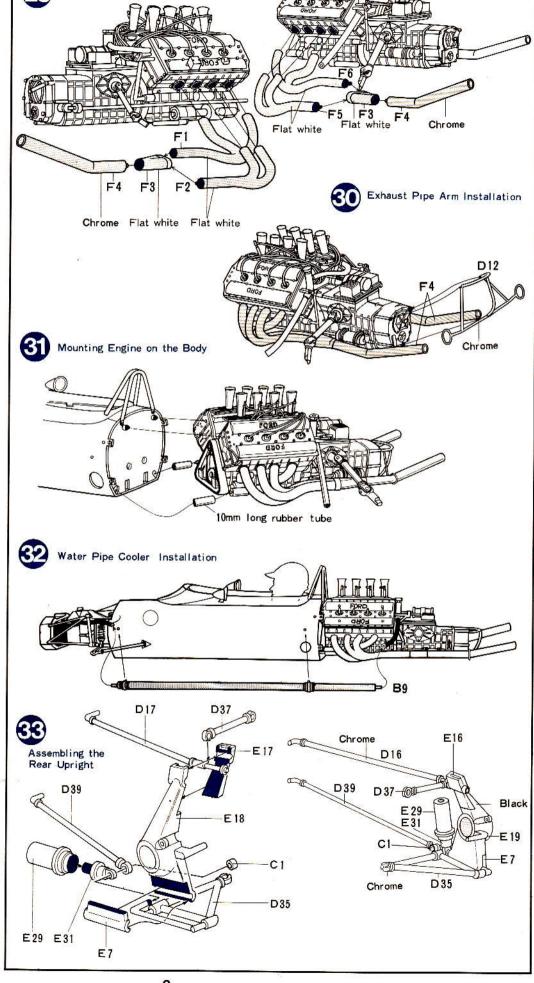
Water pipe cooler Installation Cement the water pipe B 9 to the
